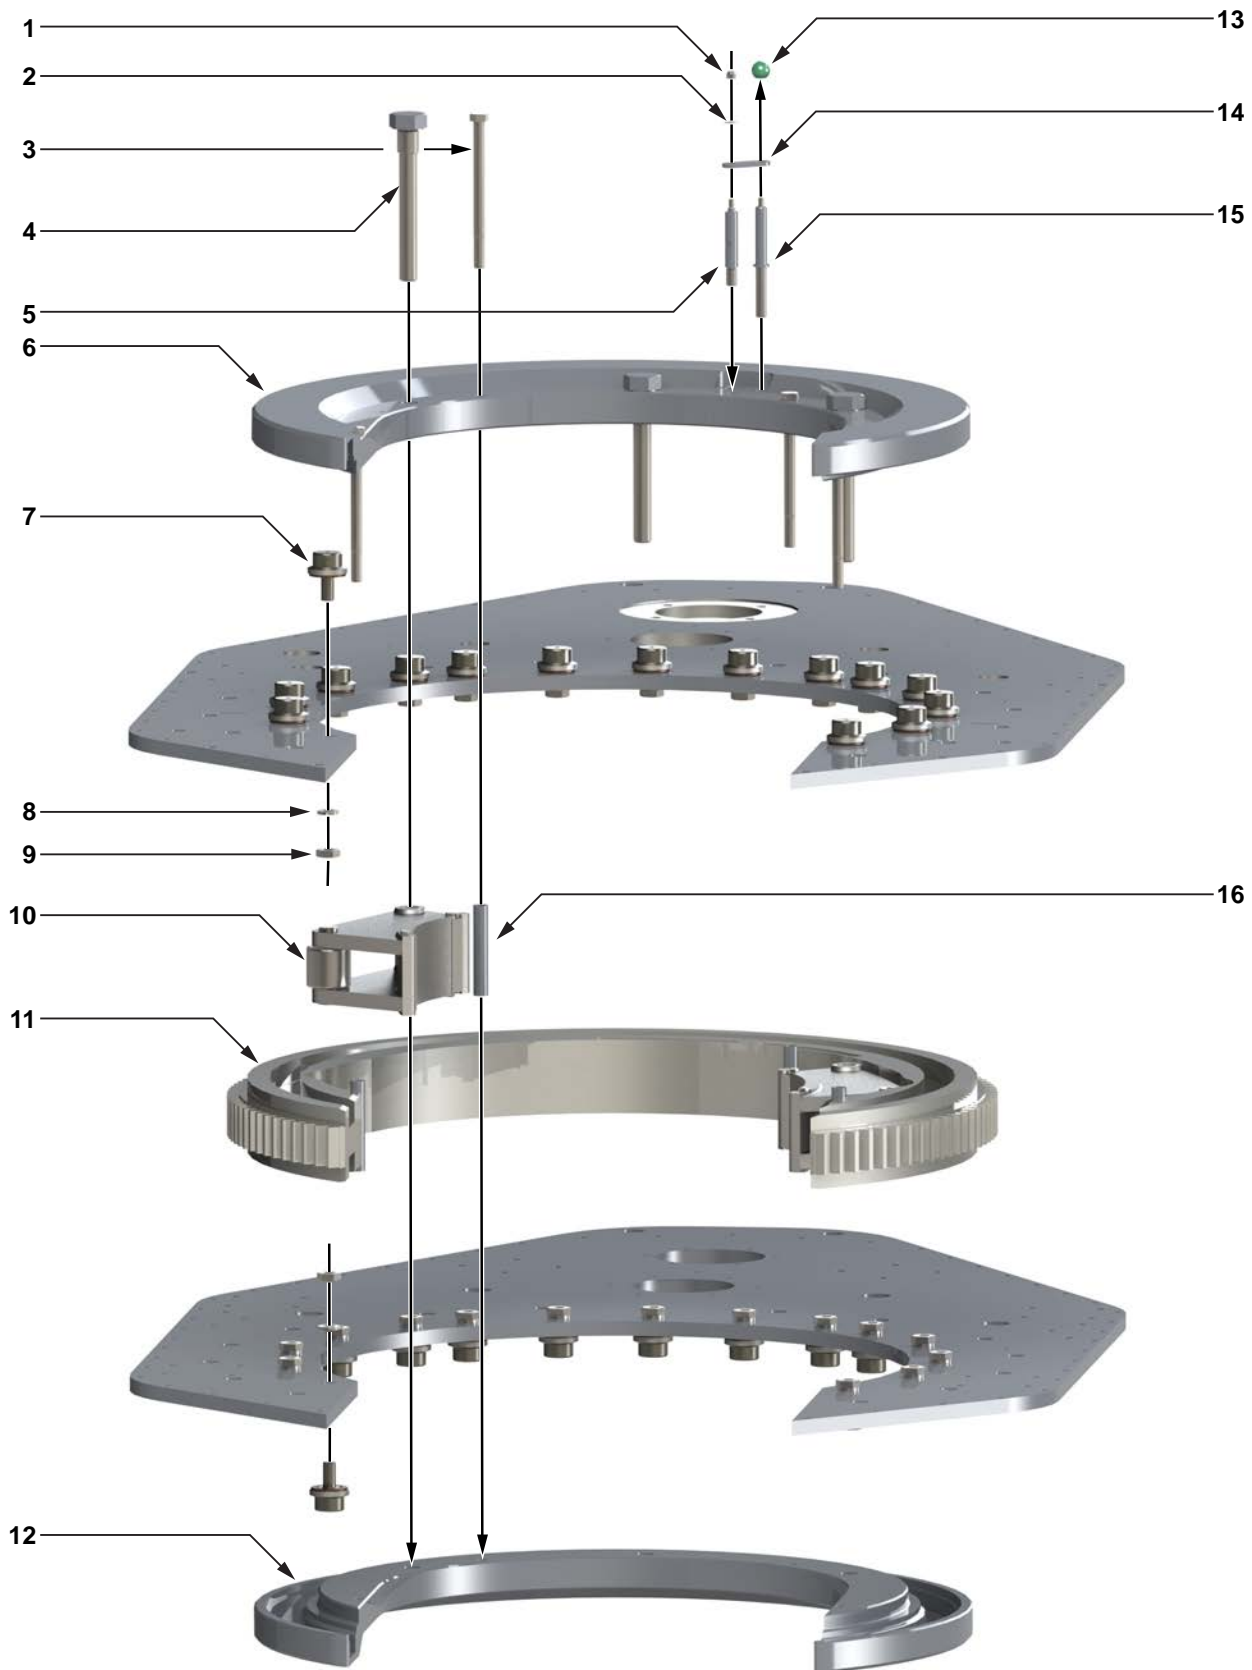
101-3011 HD31-80K Motor & Drive Assembly Exploded
